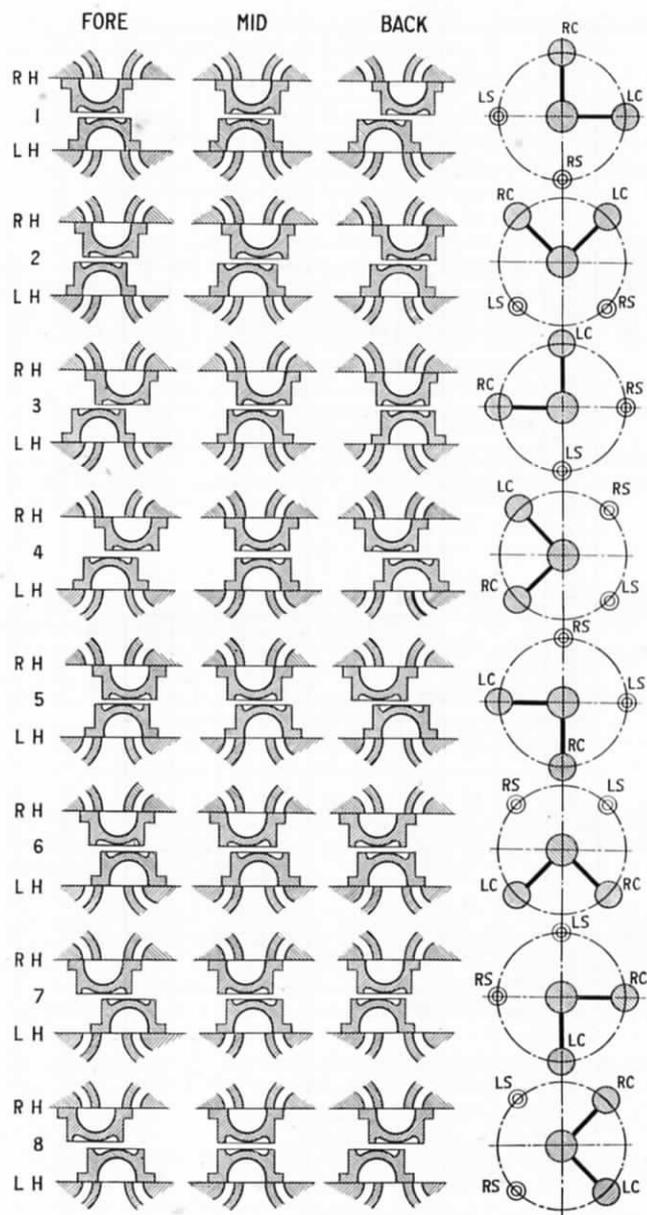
RELATIVE POSITIONS OF CRANKS, VALVES, AND SLIDE RODS.
